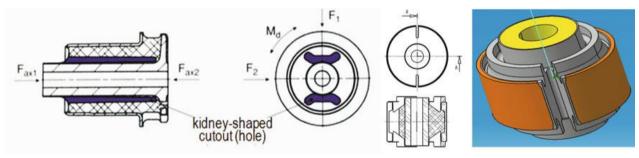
Bushing with holes and integrated bumpstop left. Bushing with intermediate sleeve right, [10].
